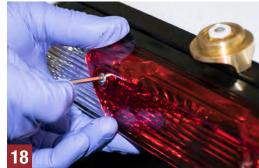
Re-connect the light housing in the reverse manner as removal. With the power harness attached, route back through the opening and with the clips aligned with the small openings push up to attach back in place. Fig. 17-19 Re-install the light housing utilizing the provided longer button head cap screws for the middle two (2) holes and the shorter button head cap screws for the outer two (2) holes. With the 3rd Brake Light Antenna Adapter installed, attach desired compatible antenna with NMO standard threaded antenna connector and fasten the PL-259 male UHF connector to preferred 2-way radio.
